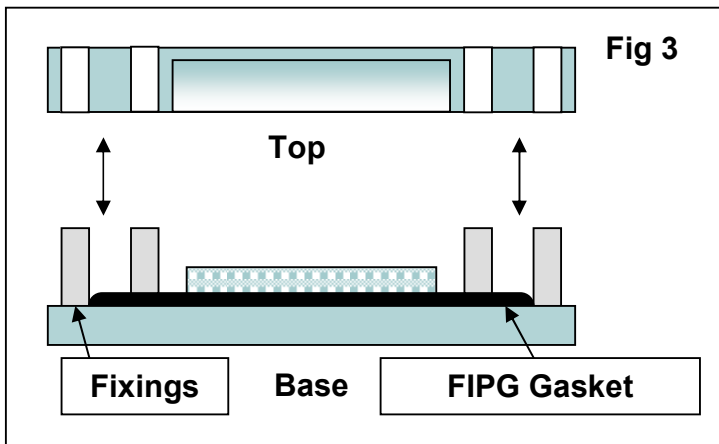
shows a typical two component housing with a top and a bottom. A gasket seal needs to be provided between the two surfaces.
